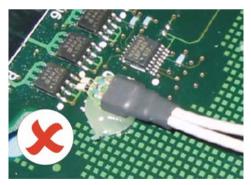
Incorrect securing method because glue is placed on the probe head tip
